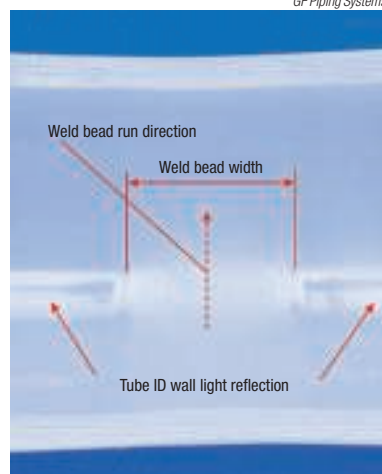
This image shows a section view of a BCF fusion weld [3]
